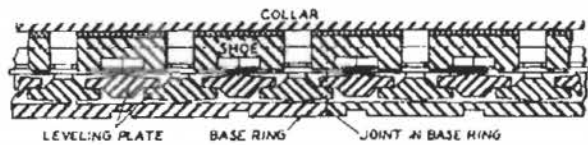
Developed section, showing how the leveling plates of Style J and B thrust bearings distribute the load equally among the six shoes.
